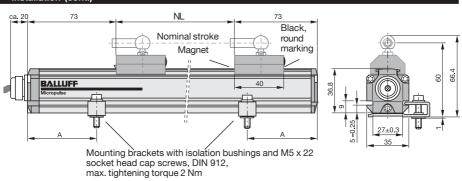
Dimensional drawing (BTL5...P-KA transducer with captive magnet BTL5-F-2814-1S)
